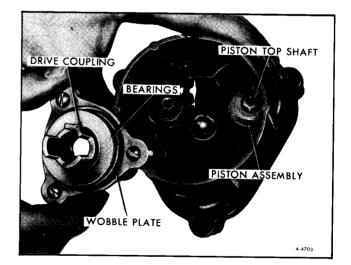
Removing Wobble Plate with Bearings and Drive Coupling
